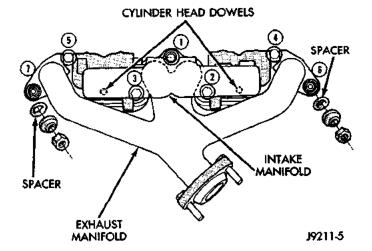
Intake/Engine Exhaust Manifold Installation 2.5L Engine
